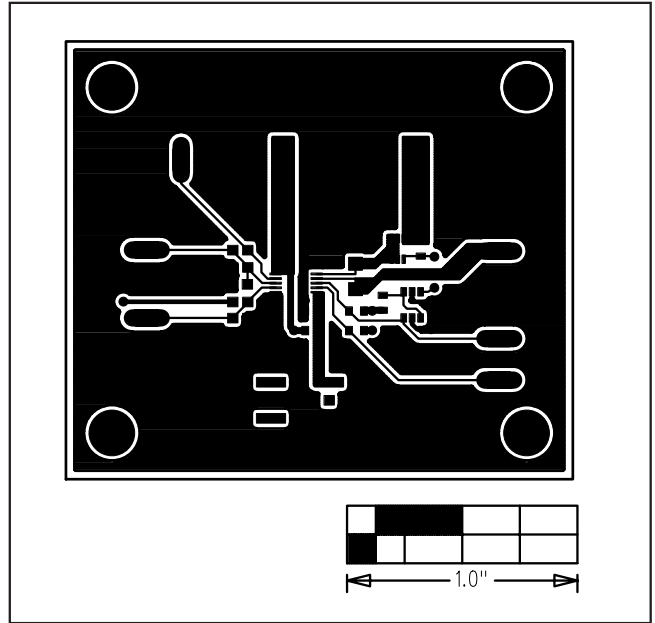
MAX4374 EV Kit PCB Layout—Component Side
